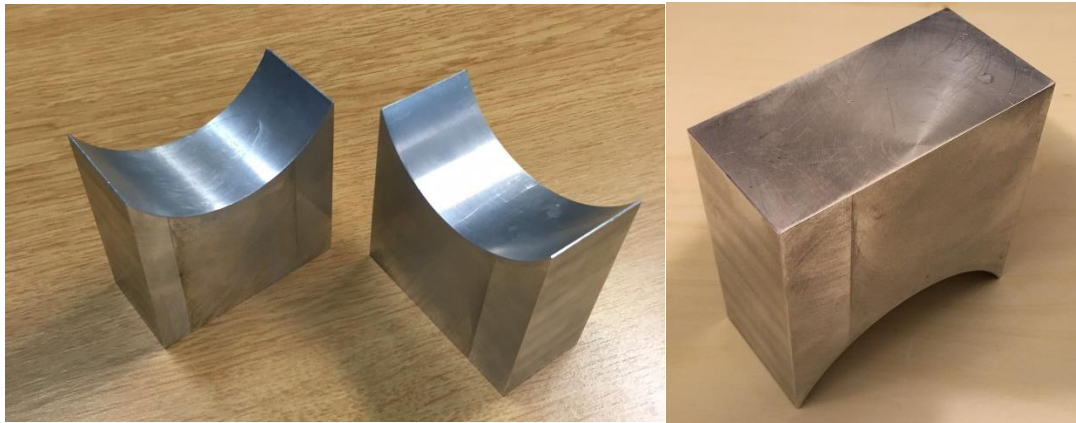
Picture of the metal pieces for creating contact between the pipe and ultrasonic sensor
